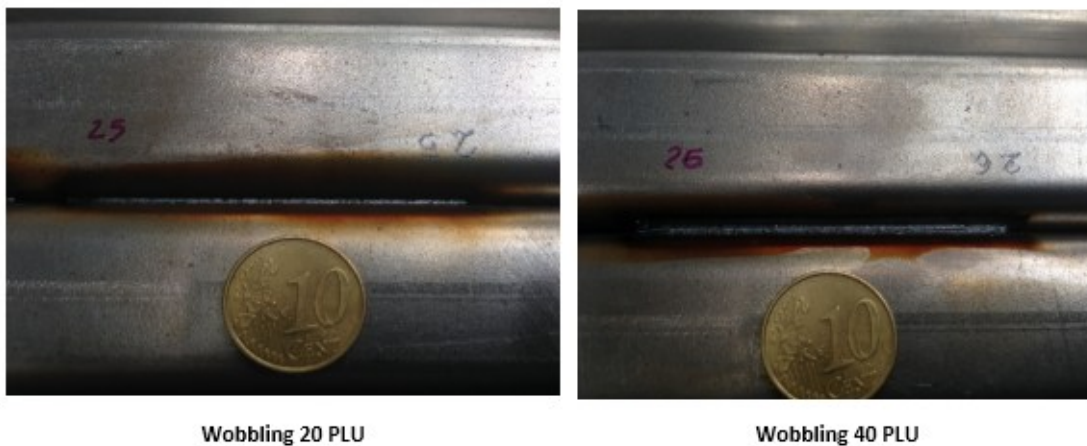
Flanged joints wobbling test, P=3Kw, V= 30 mm/s
